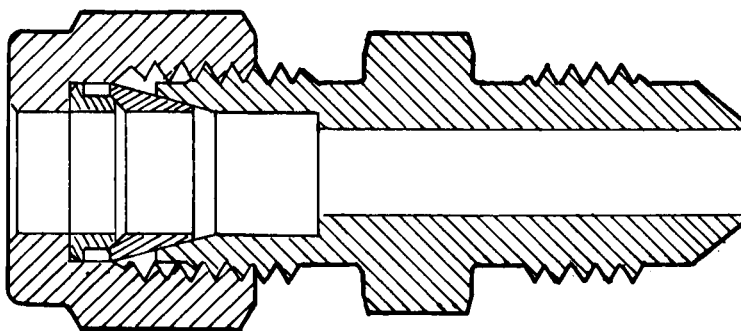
End of 347 Stainless-Steel Stress-Corrosion Specimen Showing High-Pressure Fittings
